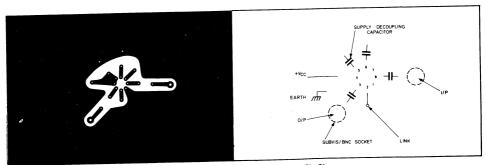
PC layout for 50- Ω line driver (see Fig. 6)
